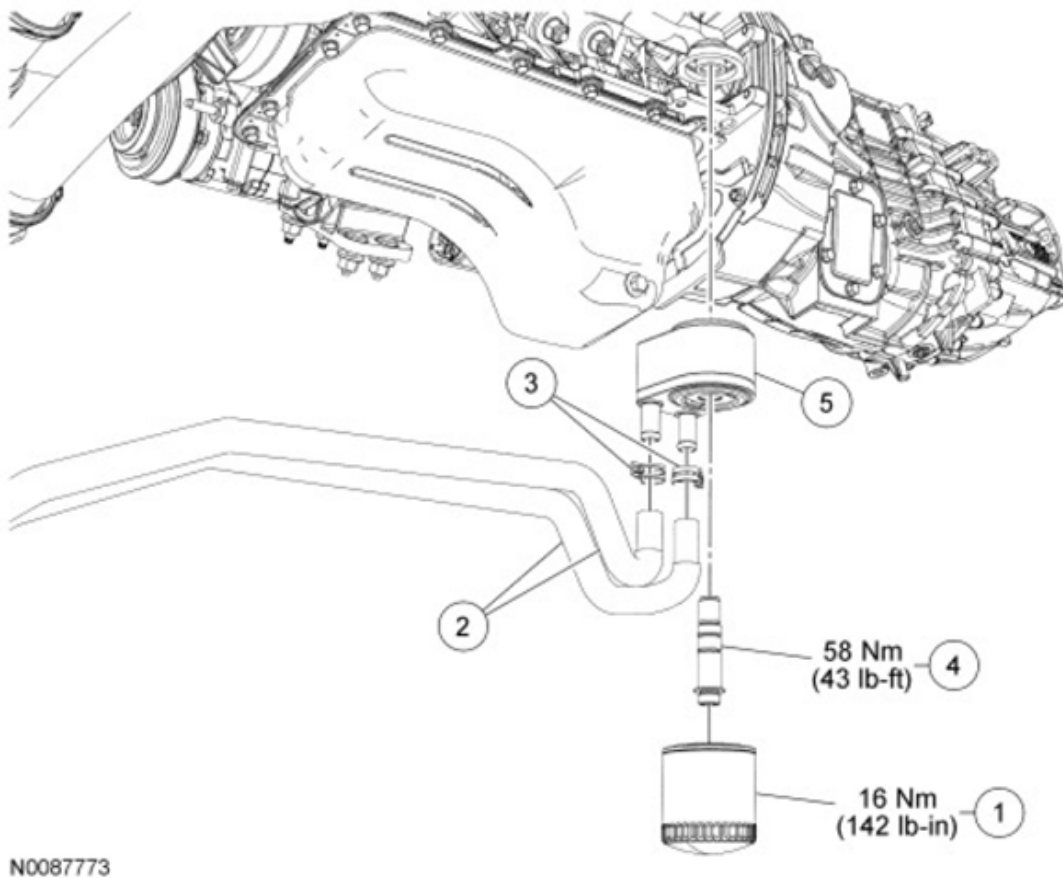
Identifying Oil Cooler Components With Torque Specifications
